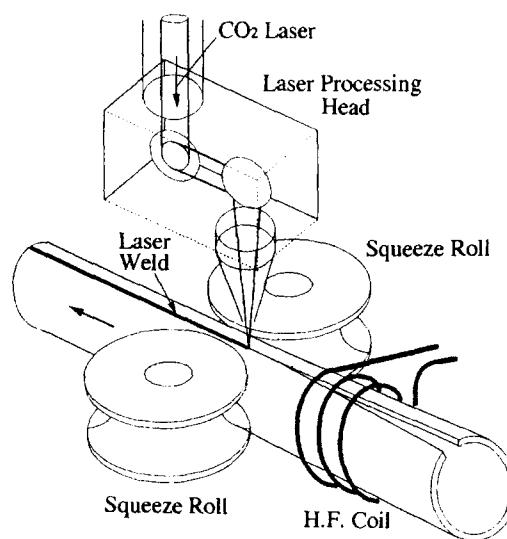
Laser assisted HF welding in thin thickness pipe [9]
